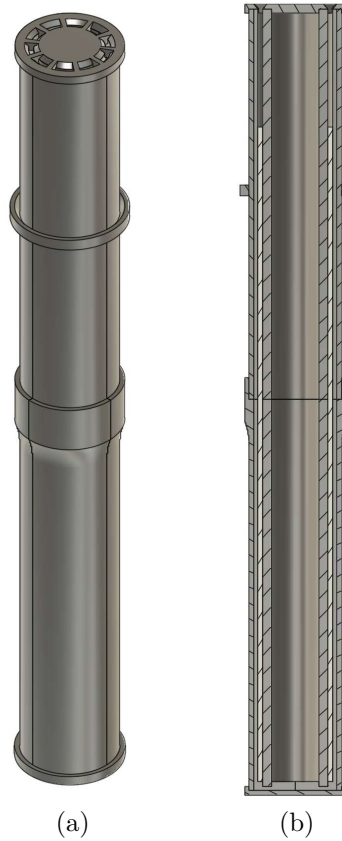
(a) Rendering of the assembled phantom mold (b) cutting analysis of the mold where the 3D printed mold is shown in dark grey and the silicon phantom in white.
